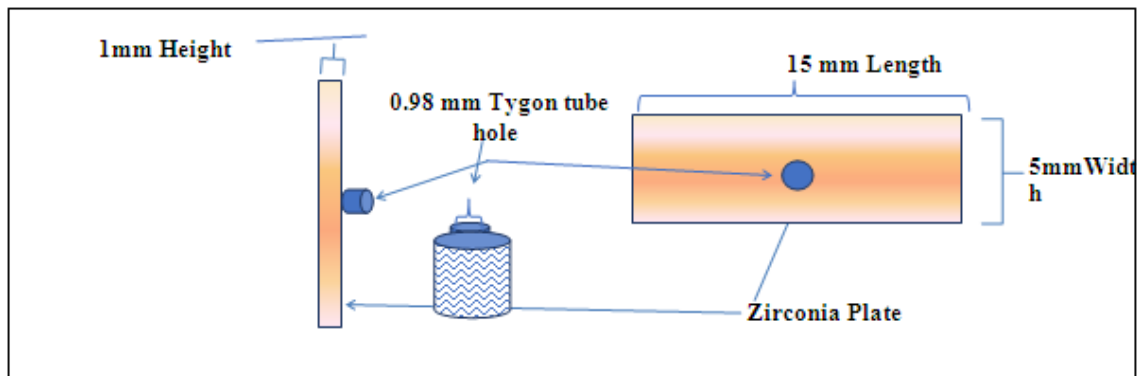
The attached pre-sintered specimen after milled from the zirconia blank.
